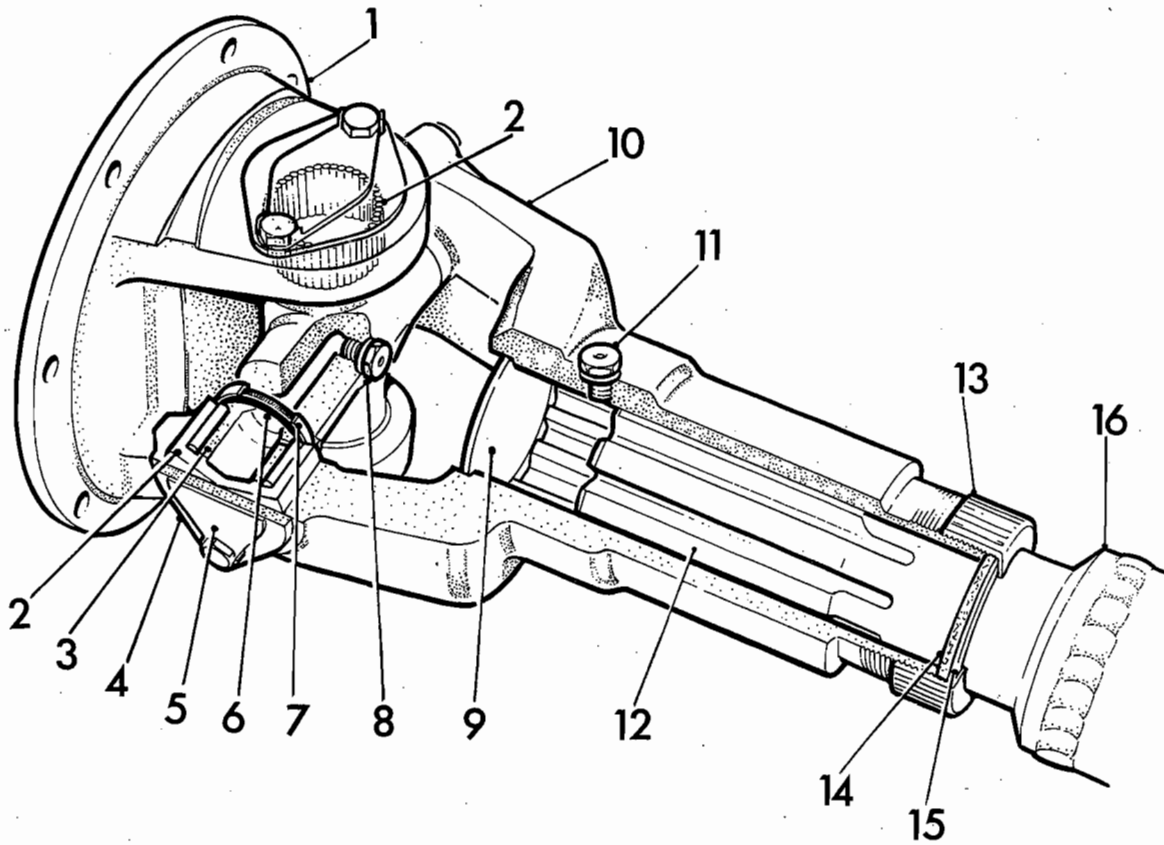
SECTION THROUGH TYPICAL UNIVERSAL JOINT
